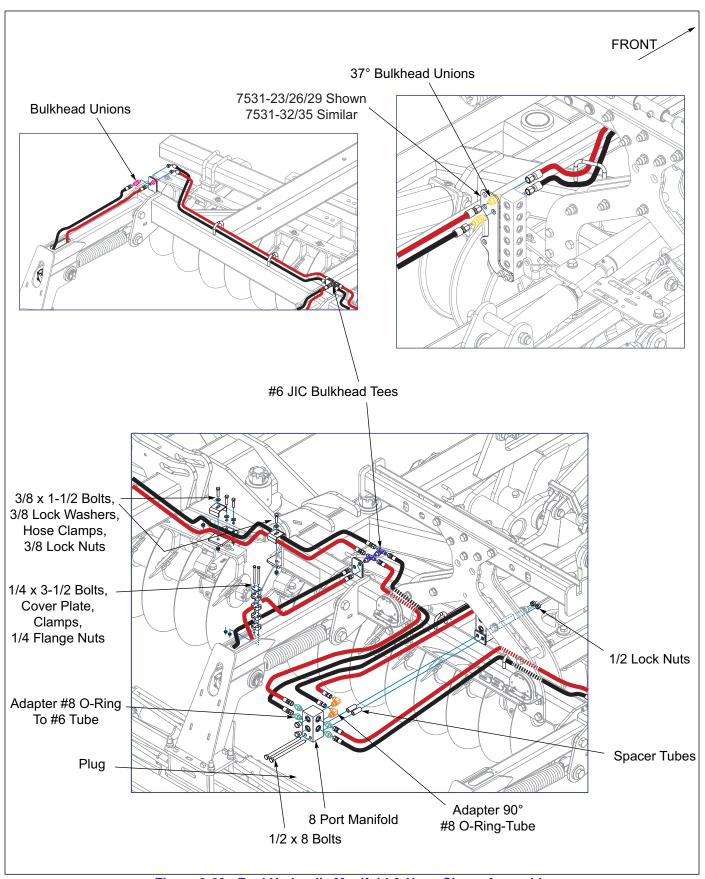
Reel Hydraulic Manifold & Hose Clamp Assembly
